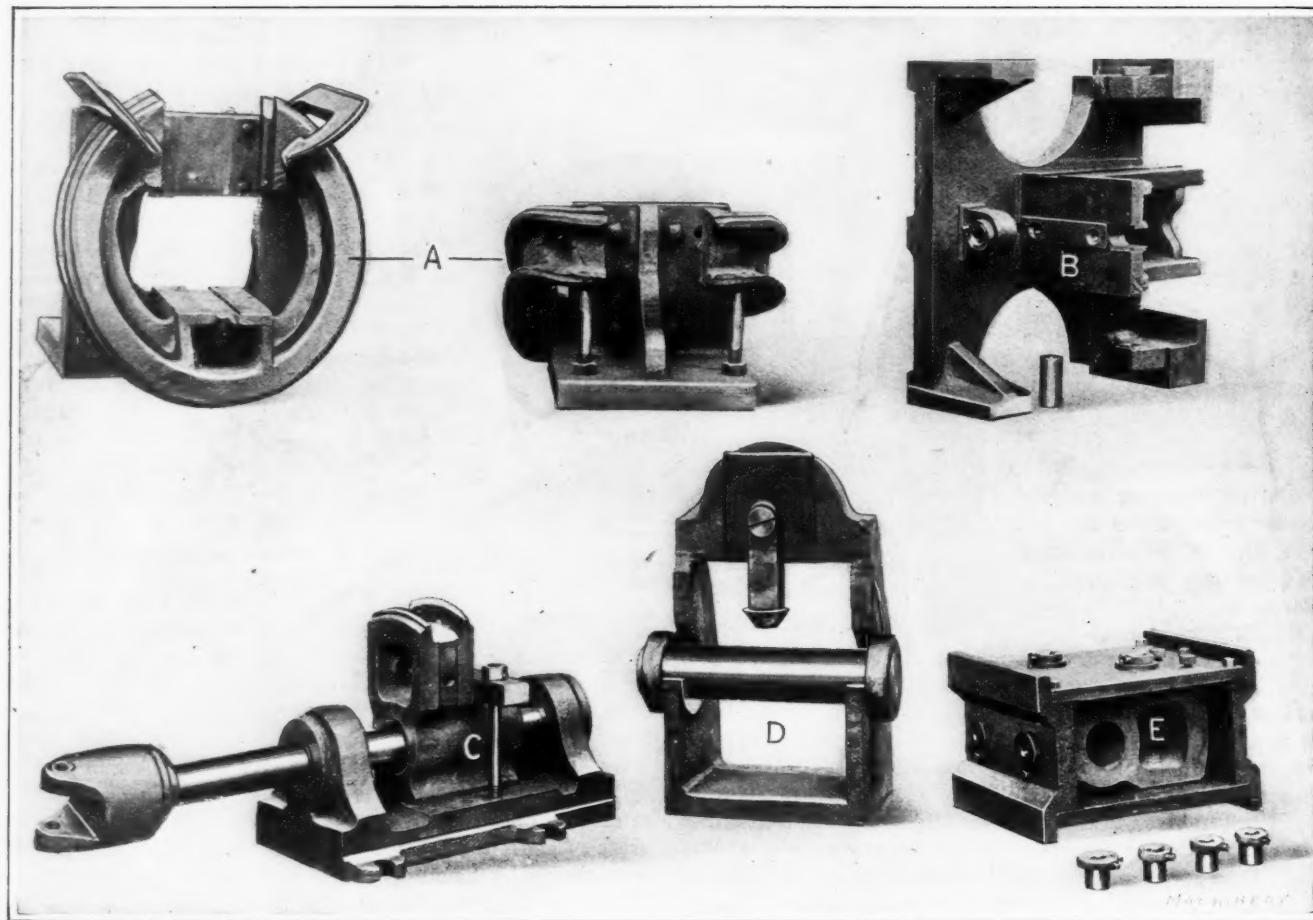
A, Shaper Fixture for Lead Cams; B, Drill Jig for Lead Cams; C, Boring Fixture for Lead Cam Hubs; D, Die Cam Testing Fixture; E, Drill Jig for Lead Cam Hubs
